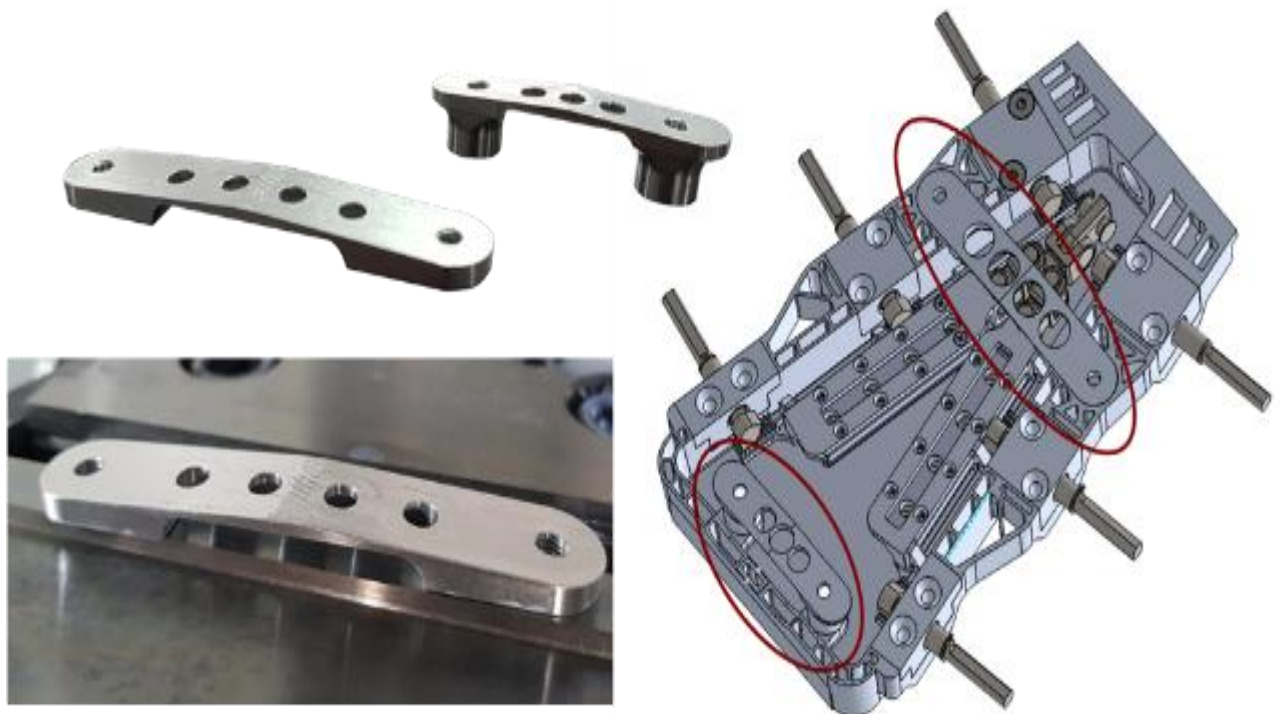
CNC manufacturing of the fixing brackets on the crankcase.
